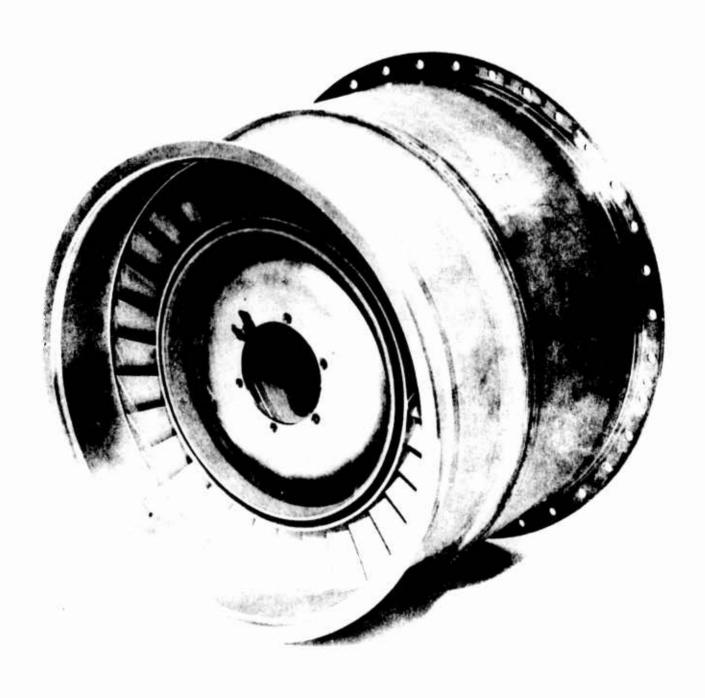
Combustor and Turbine Nozzle Assembly (Aft View). The Improved Combustor is Shown in Figure 52.
